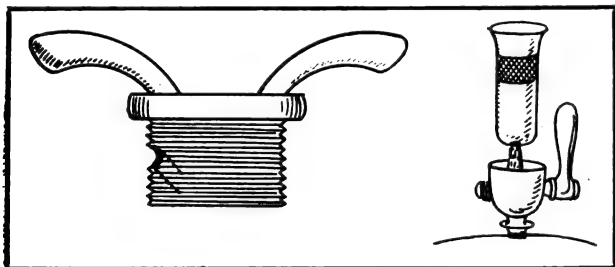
Vent Cut in Gasoline Tank Filler Cap to Release Pressure, and Primer Made from a Tire Tube Dust Cap.
